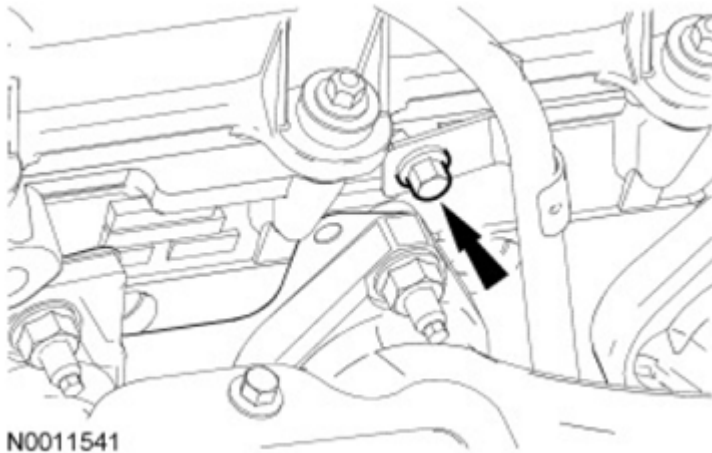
Locating Rear Oil Level Indicator Tube Bolt
